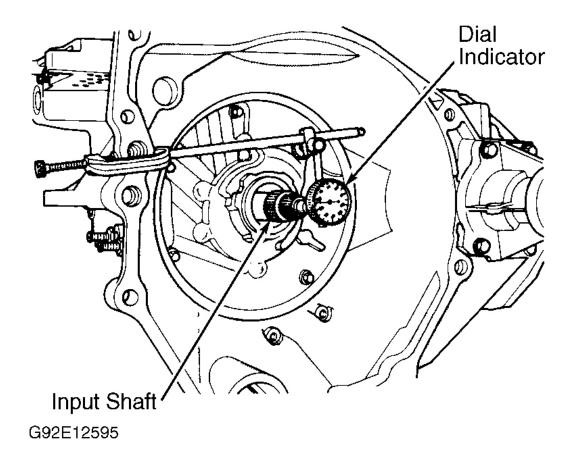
Measuring Input Shaft End Play Courtesy of CHRYSLER CORP.
